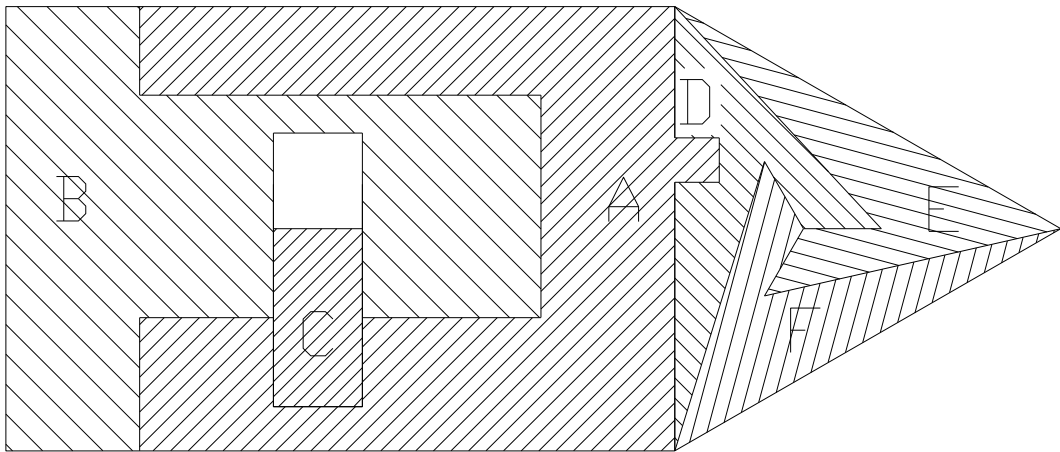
A product that can be assembled with a C-NS-L-NM assembly
